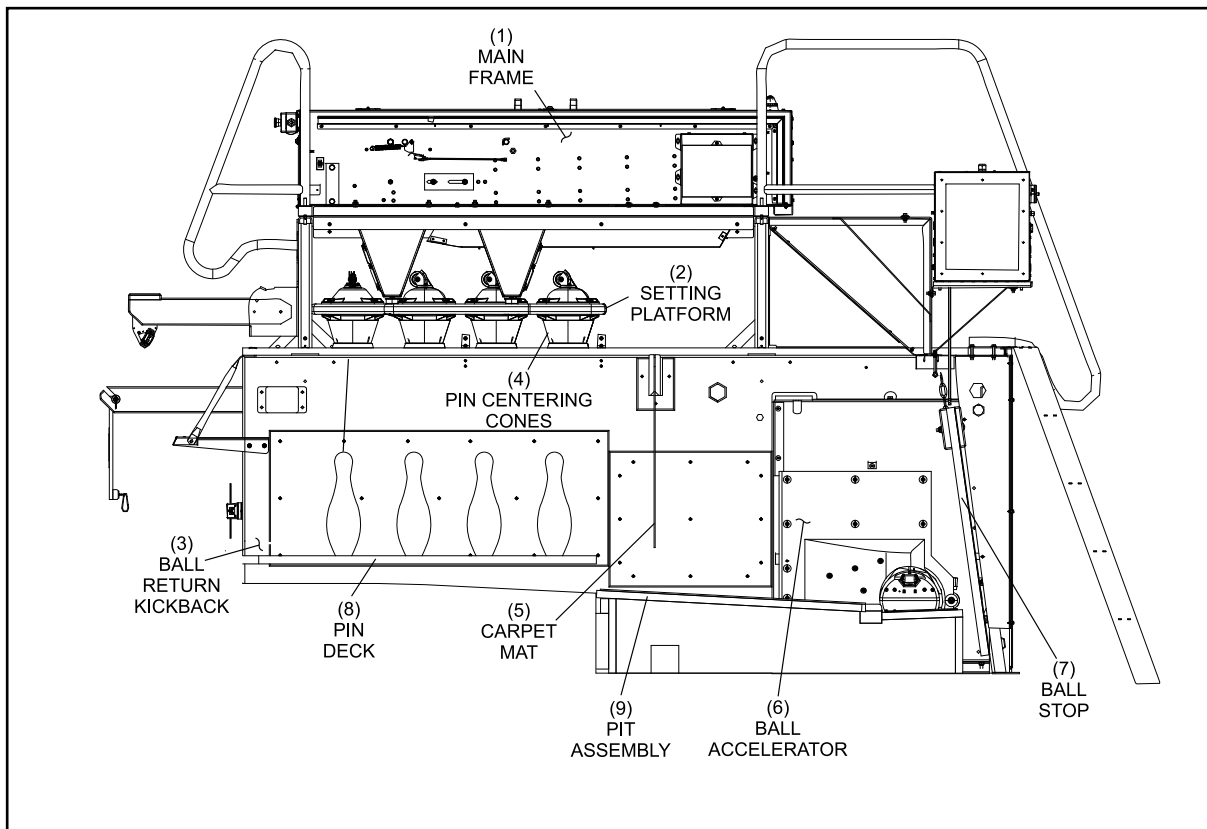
String Pinsetter Sub Assemblies and Components - Side View
